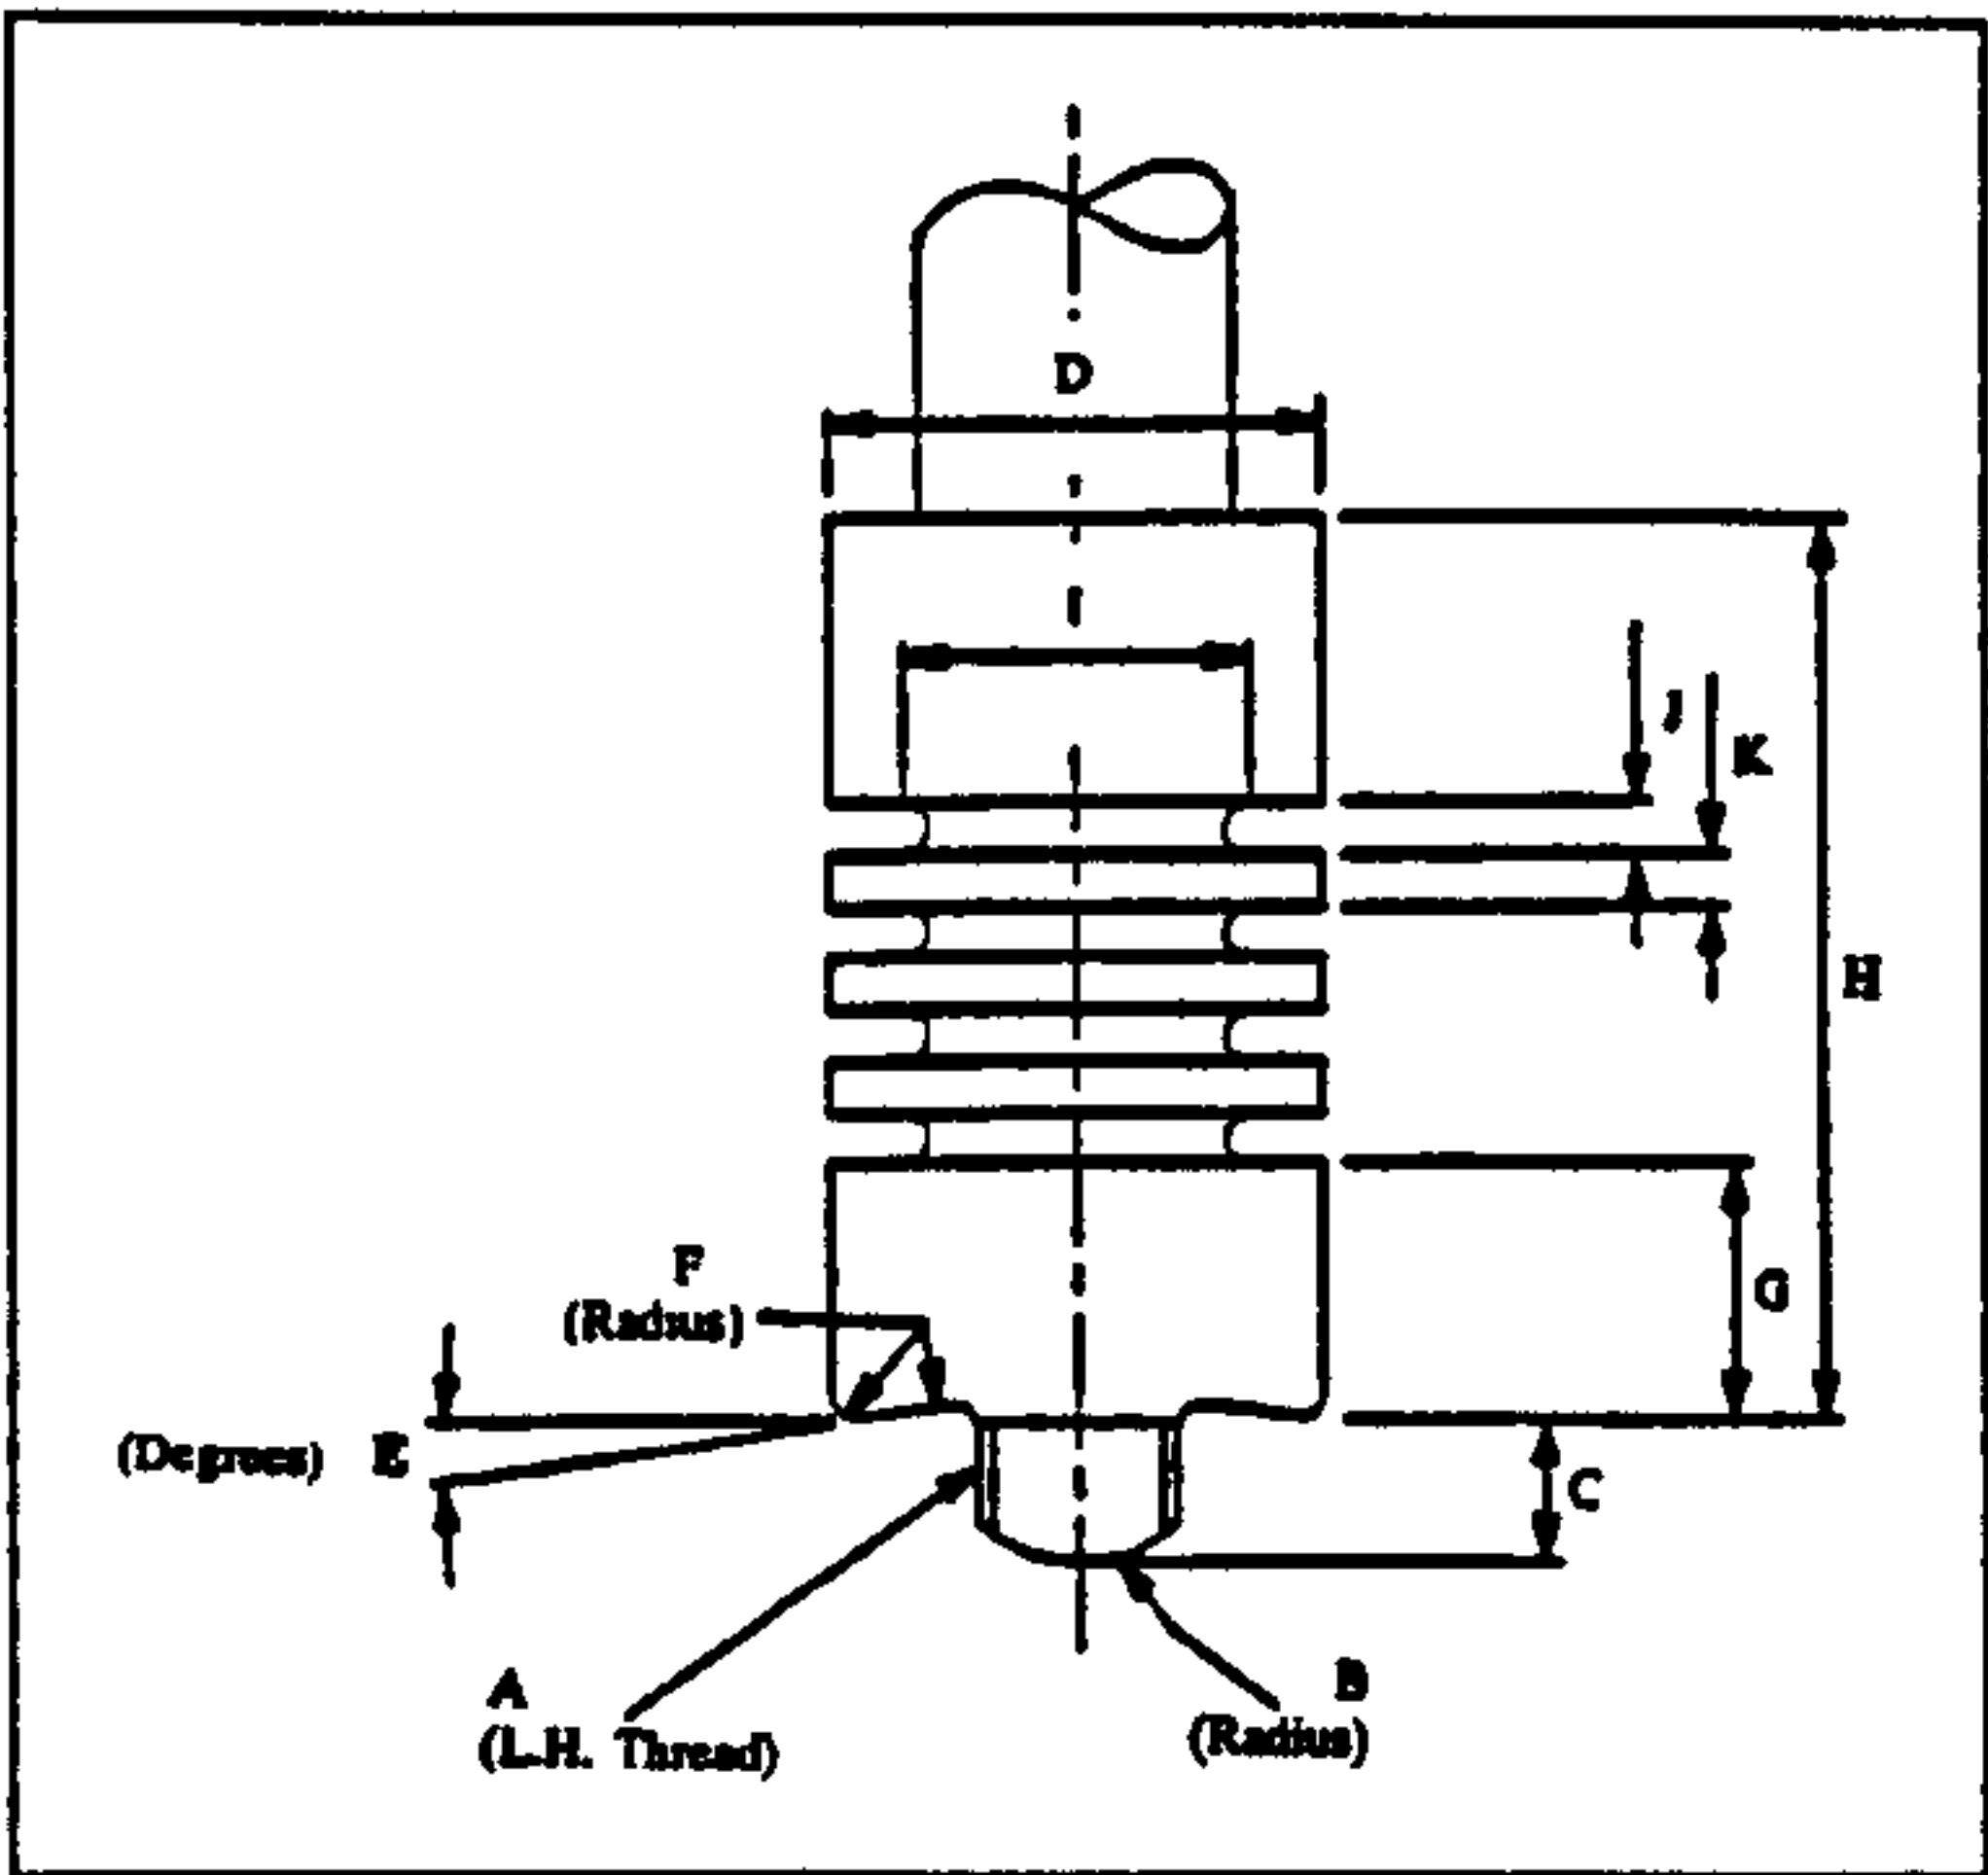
Friction stir weld 5651 tool profile¹.
